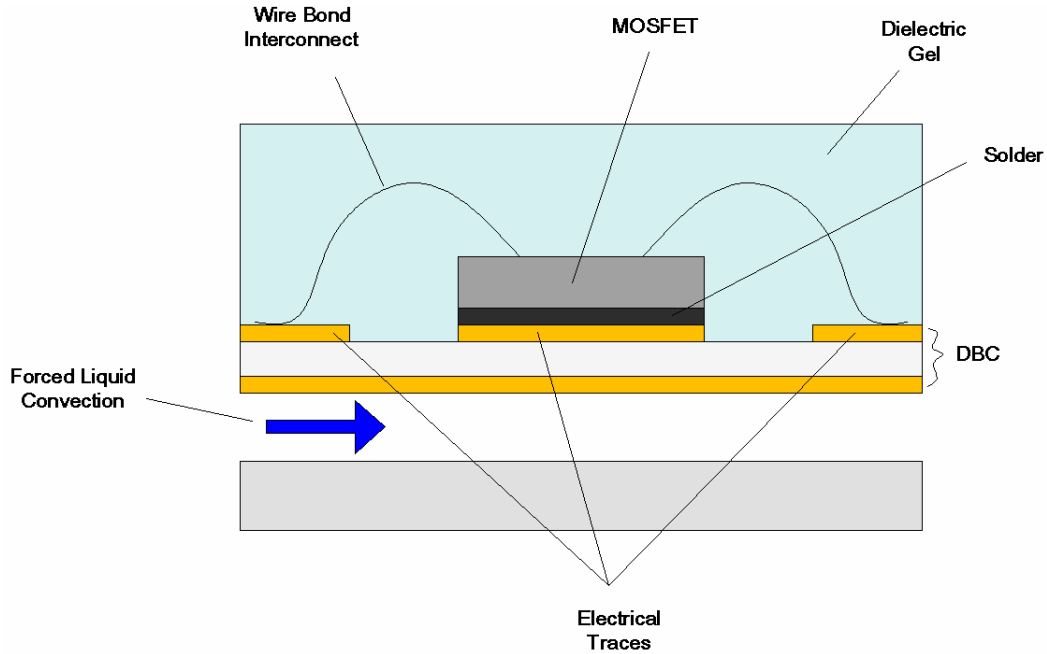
Cross section of wire bond package with single-sided liquid cooling
